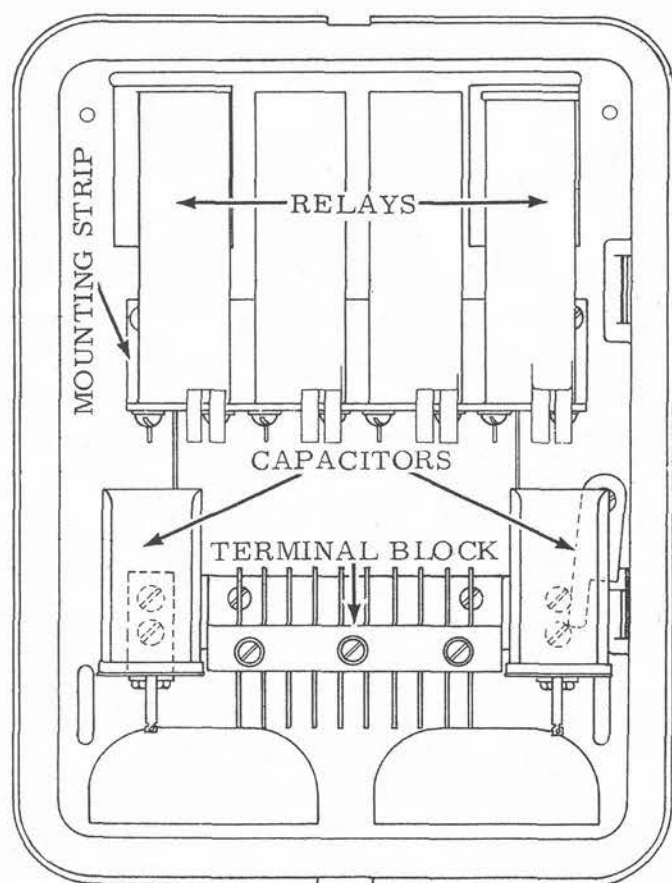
The auxiliary relay unit (H-881153 assembly 1).
